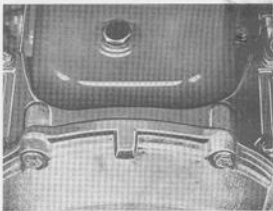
Reinforcing bracket, cylinder block—flywheel housing
